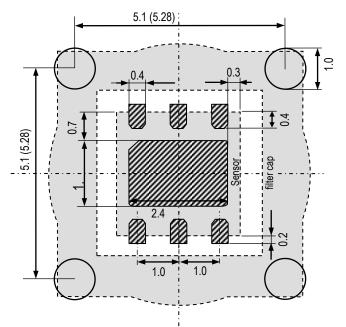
PCB layout of SHT2x and filter cap SF2. Dimensions are given in mm (1mm = 0.039 inch). The distance of the openings is 5.1mm ± 0.05 mm if the sensor should clip on the PCB and 5.28mm if the pins are used for adjustment only. By varying the openings distance about ± 0.05 mm the clipping force may be adjusted.
